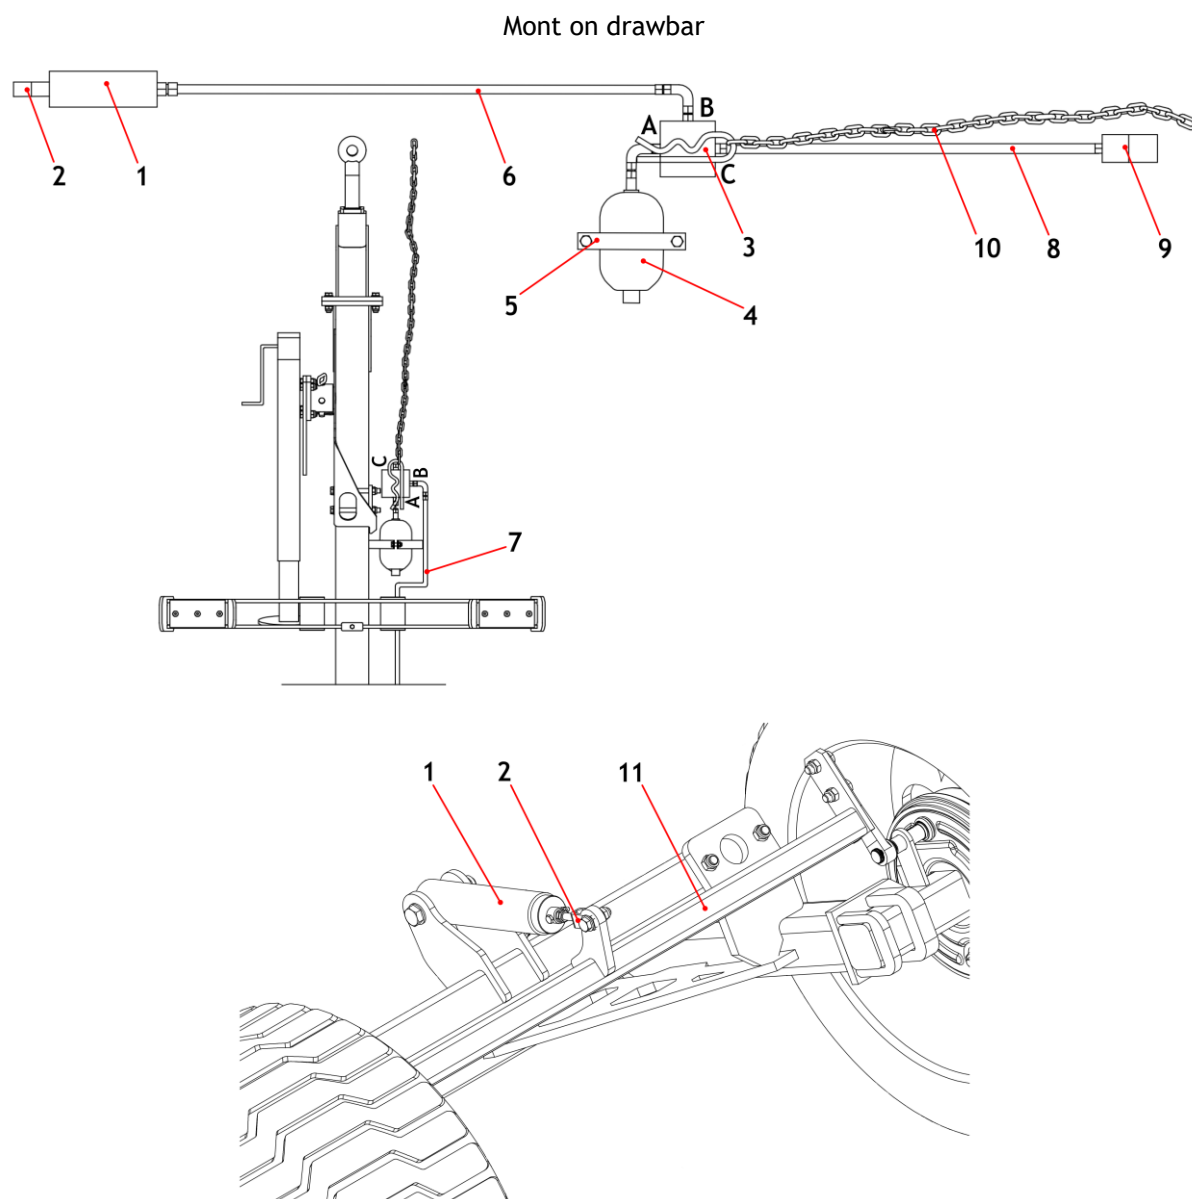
Diagram and construction of single-circuit brake system MCB SWING cultivation roller (1 - hydraulic cylinder, 2 - hydraulic cylinder holder, 3 - safety valve, 4 - hydraulic accumulator, 5 - hydraulic accumulator bracket, 6,7,8 - hydraulic line, 9 - quick coupler, 10 - chain, 11 - brake beam)
